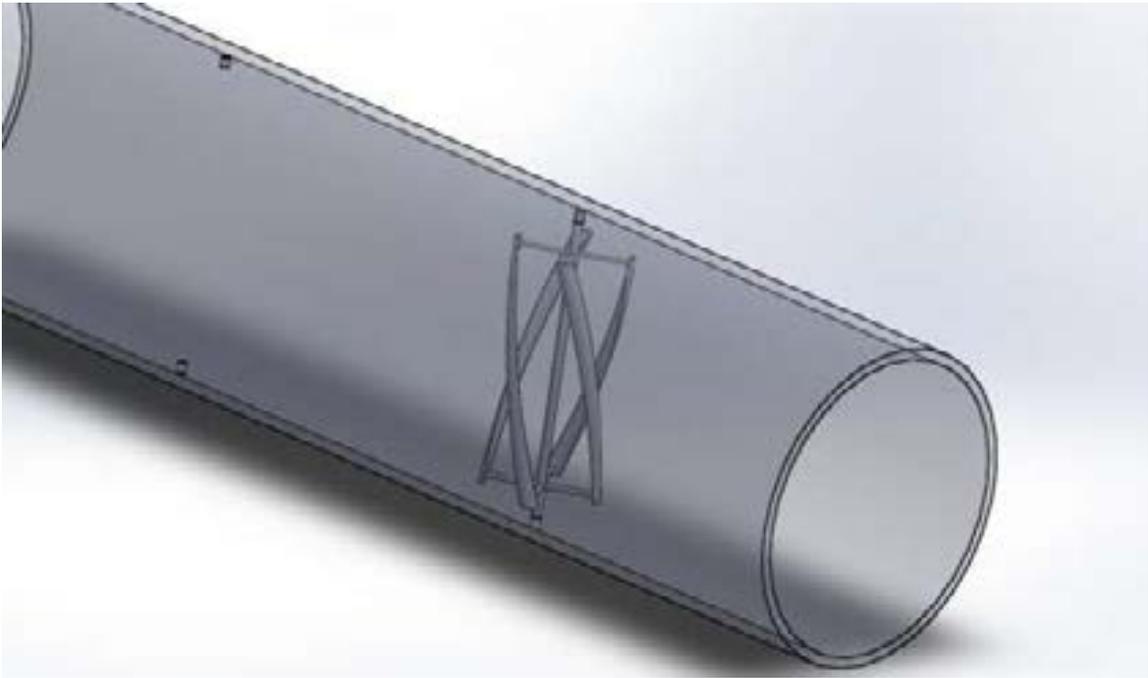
Alternate Design 2 - Perpendicular axis of rotation
